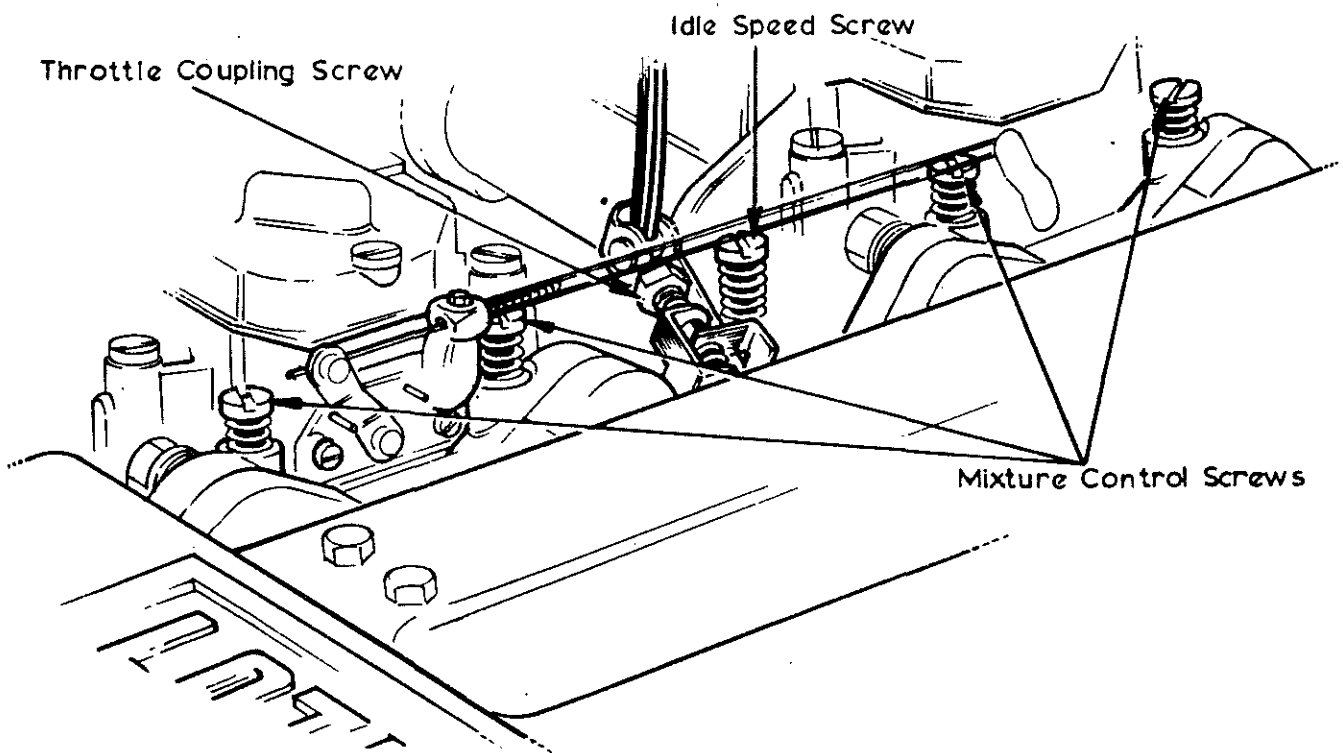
CARBURETTER ADJUSTING SCREWS (WEBER)
